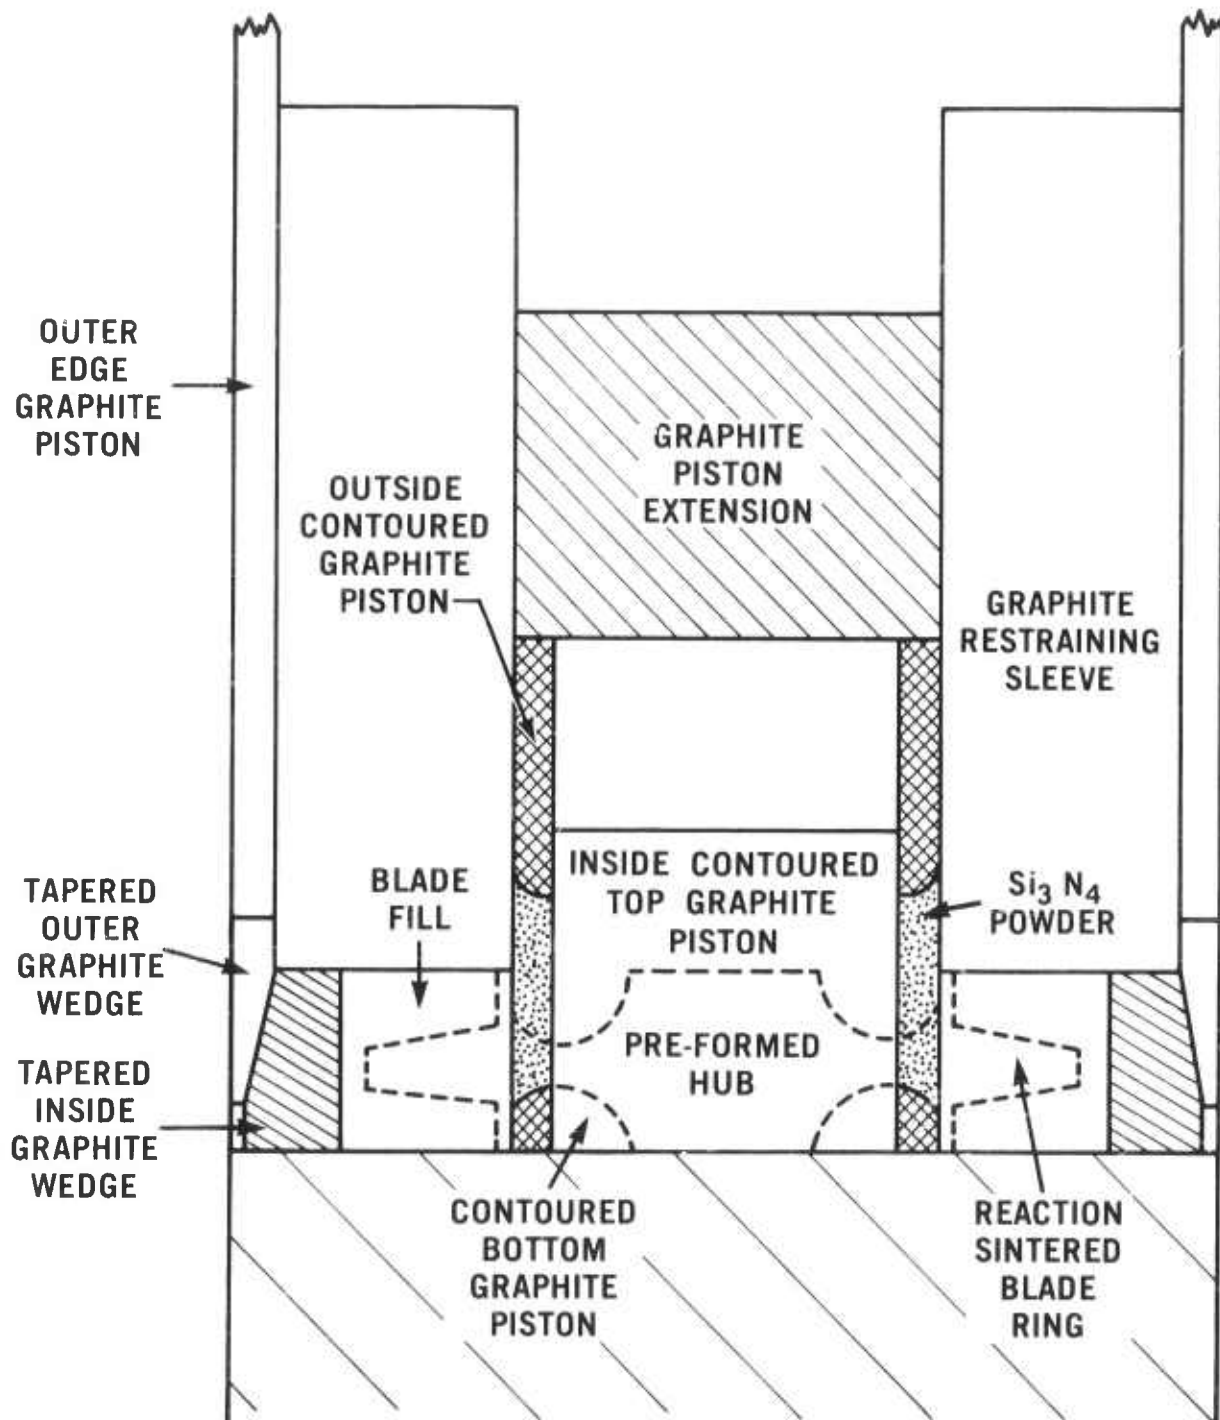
Hot Press Bonding Assembly - Three-Piece Duo-Density Rotor Concept.
